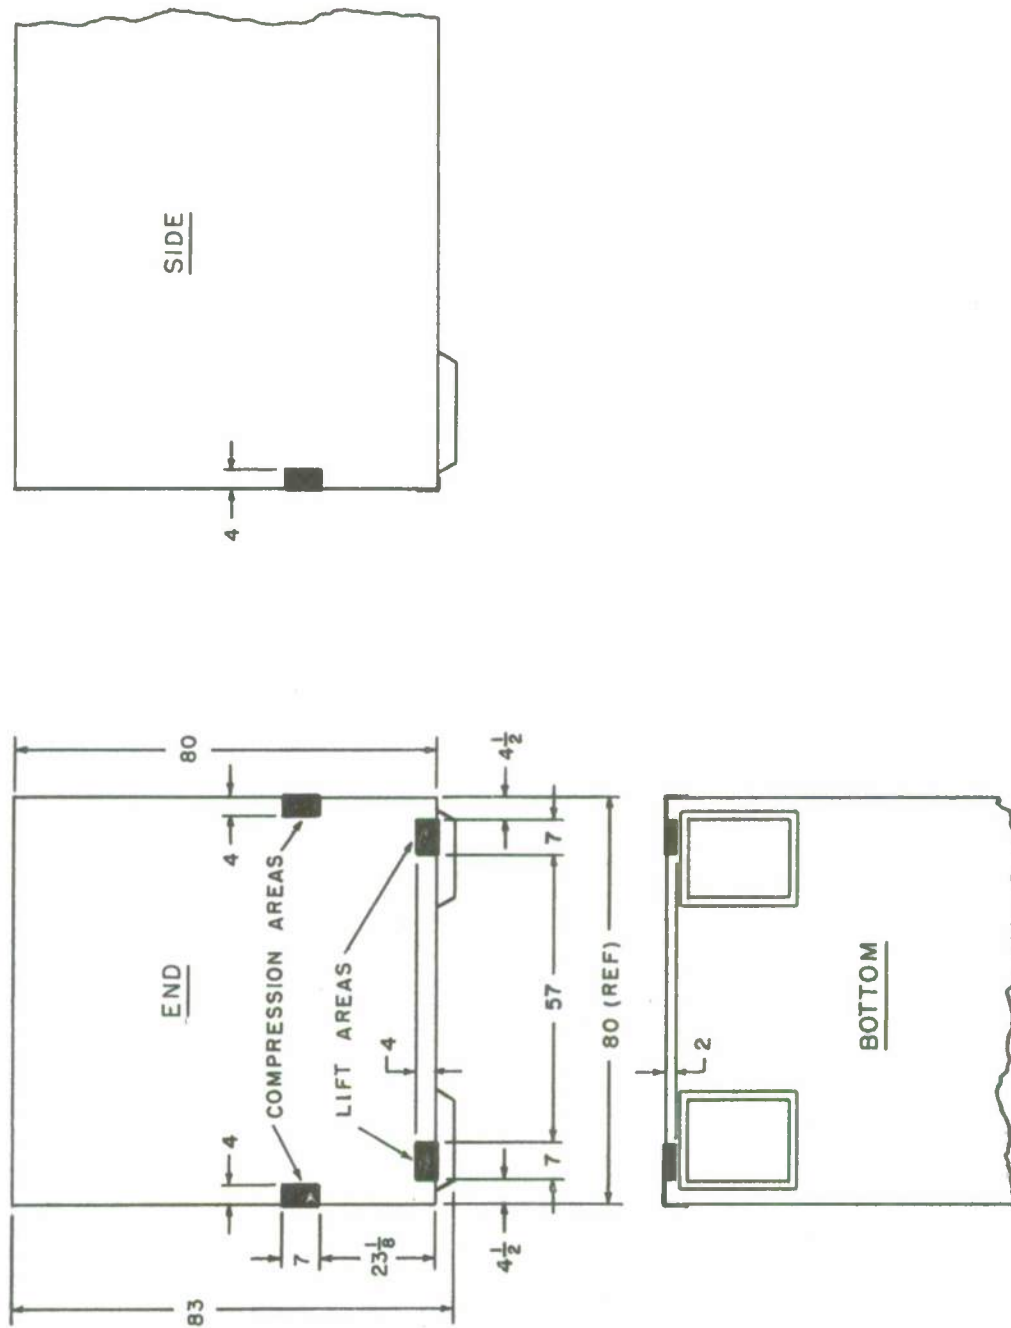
Location of Coupling Attachment, AN/TSQ-47 Shelters With Exception of AN/TSW -5
